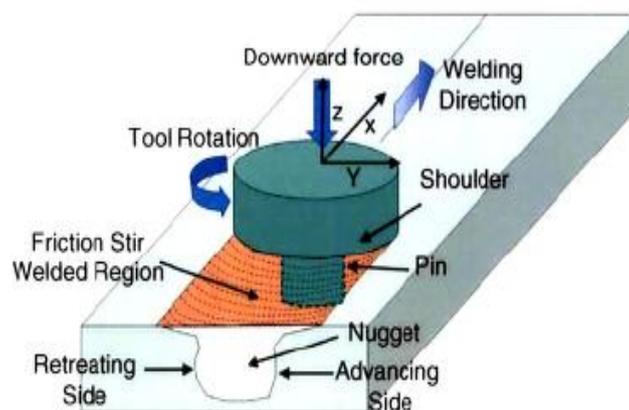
Schematic layout of friction stir weld Tool.
